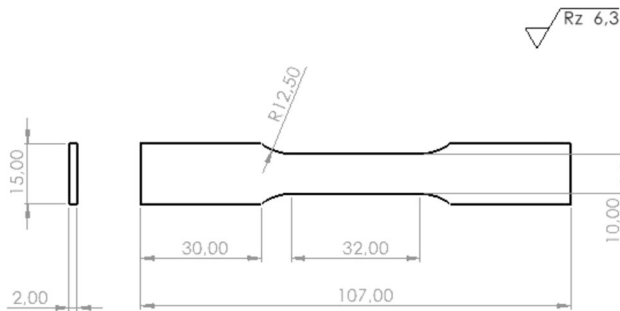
Technical drawing of samples prepared for tensile test at room temperature.
